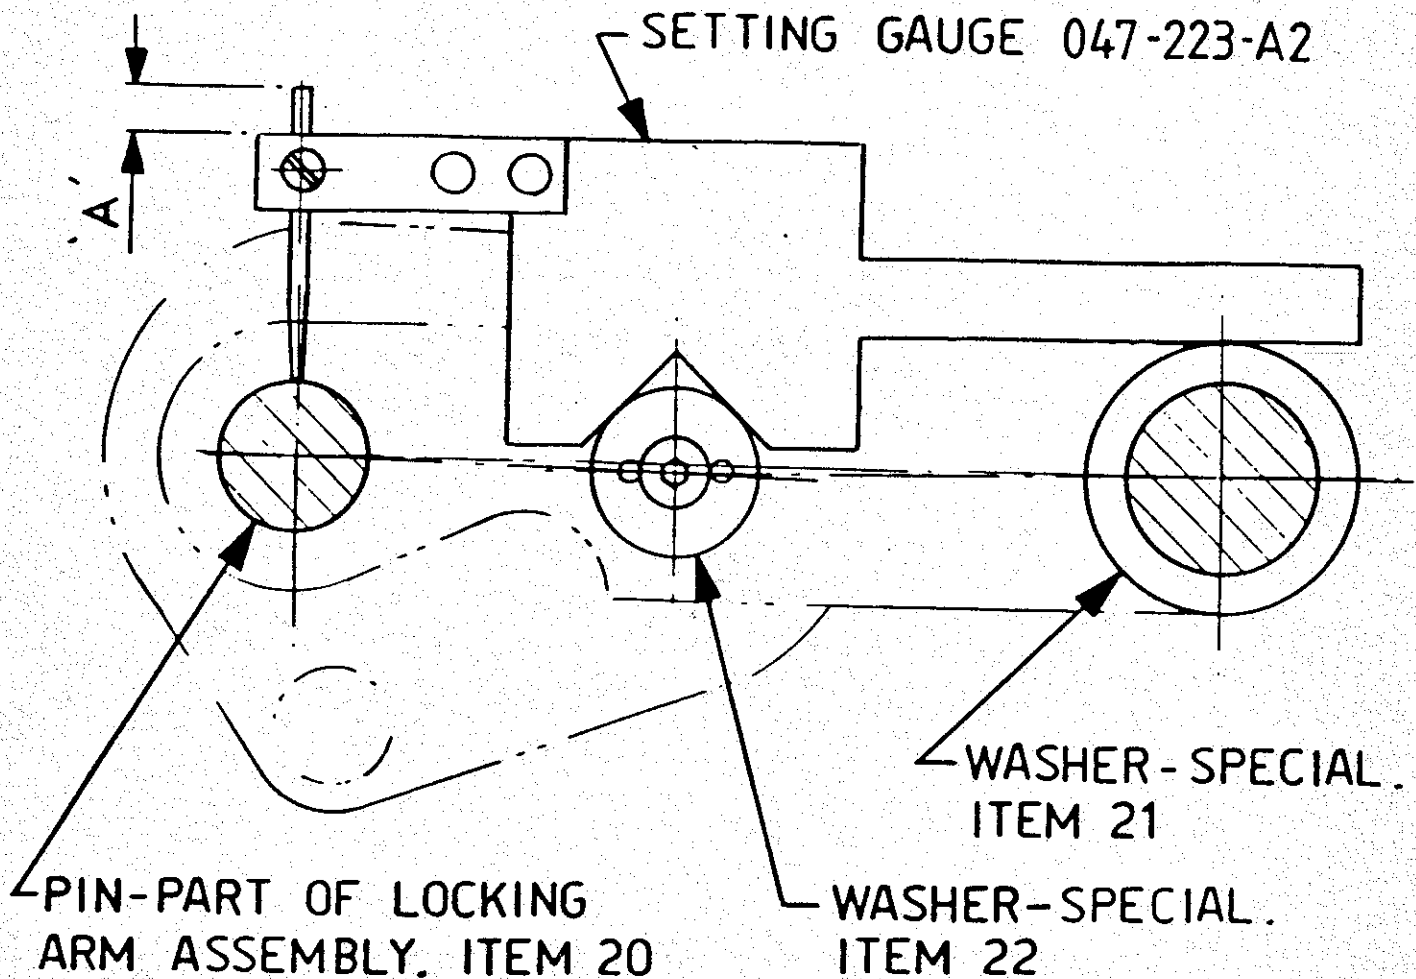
Section Through Mechanism Below Locking Arm Assembly
